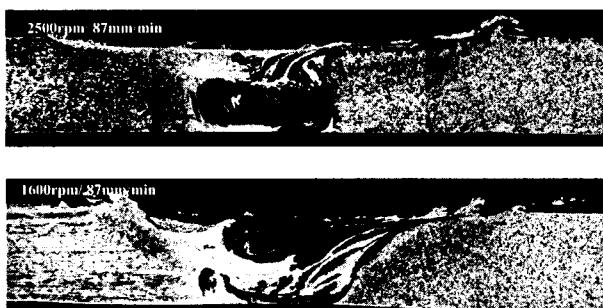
Macrostructures of butt-welded 6061 Al alloy/Cu
